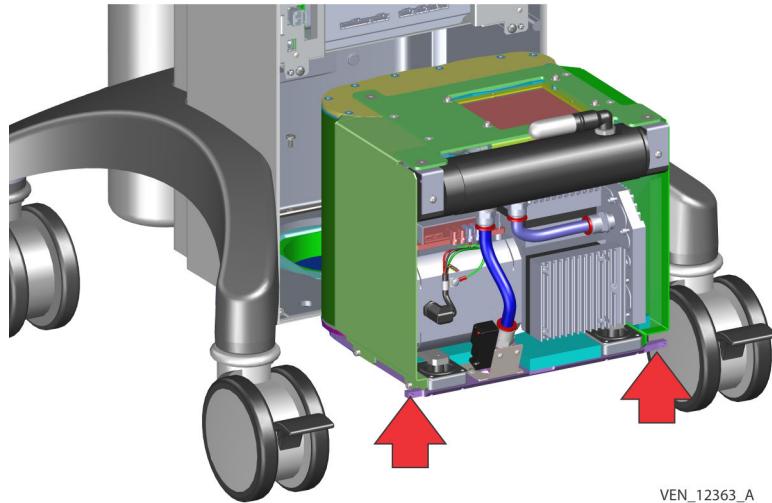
Power Module Electrical and Pneumatic Connection Removal
